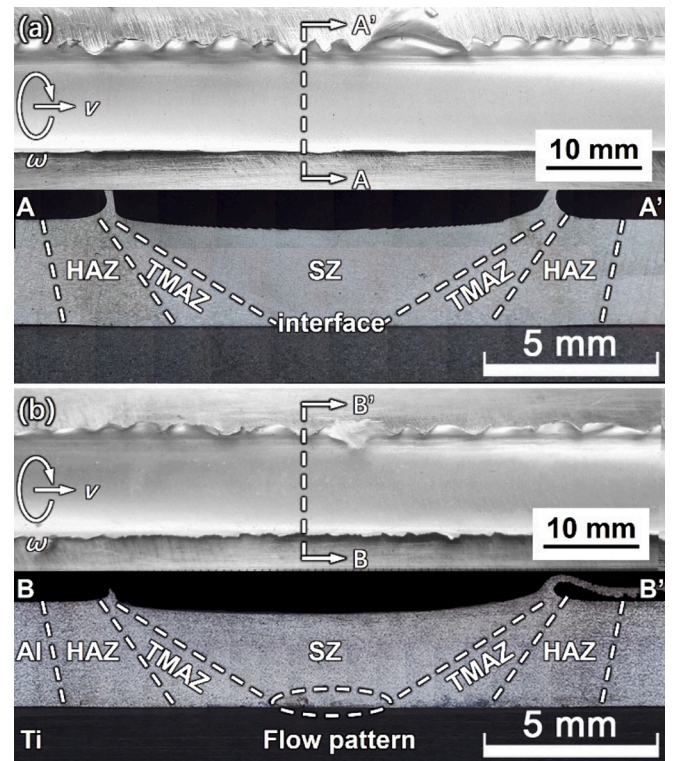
Appearance and cross-sections of Al/Ti welds ( $v = 100$  mm/min): (a) FSW weld, (b) UVFSW weld.
